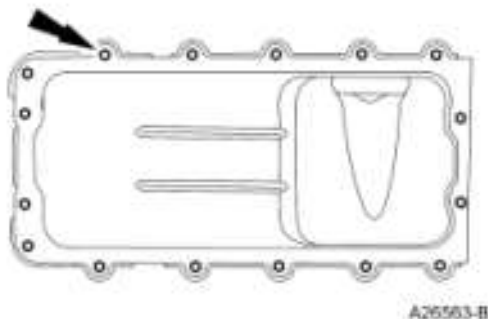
Locating Oil Pan And Oil Pan Gasket Bolts
